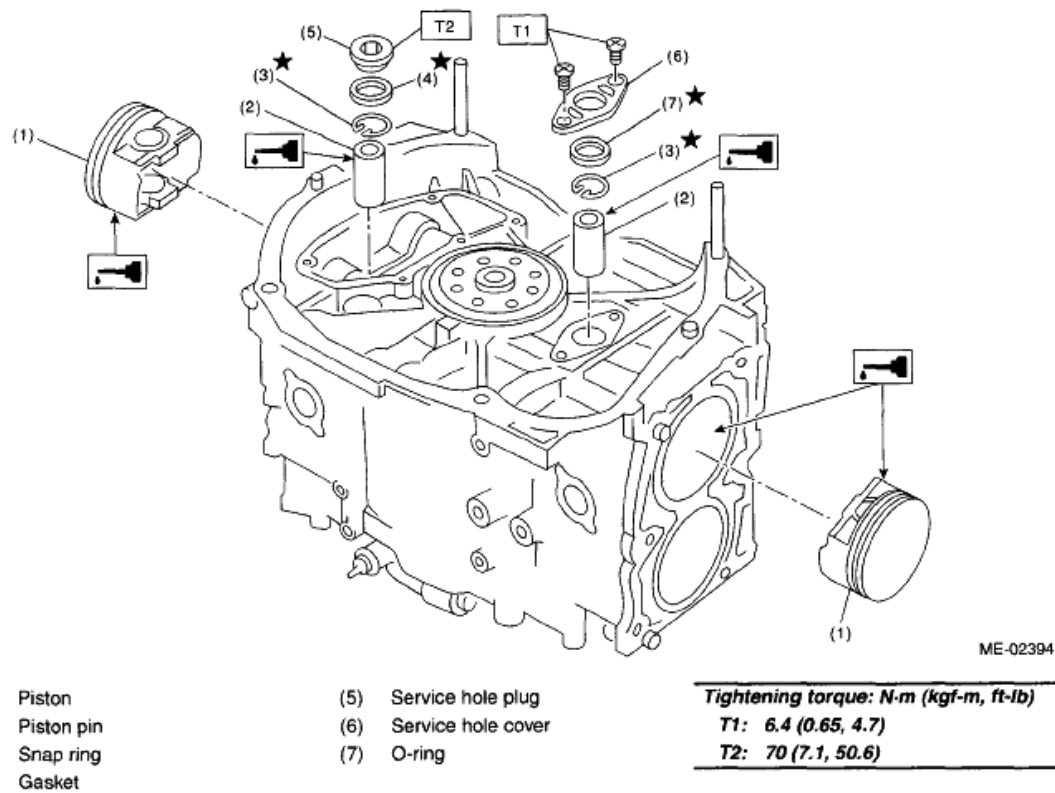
Identifying Piston, Piston Pin, Piston Ring And Service Hole Plug
